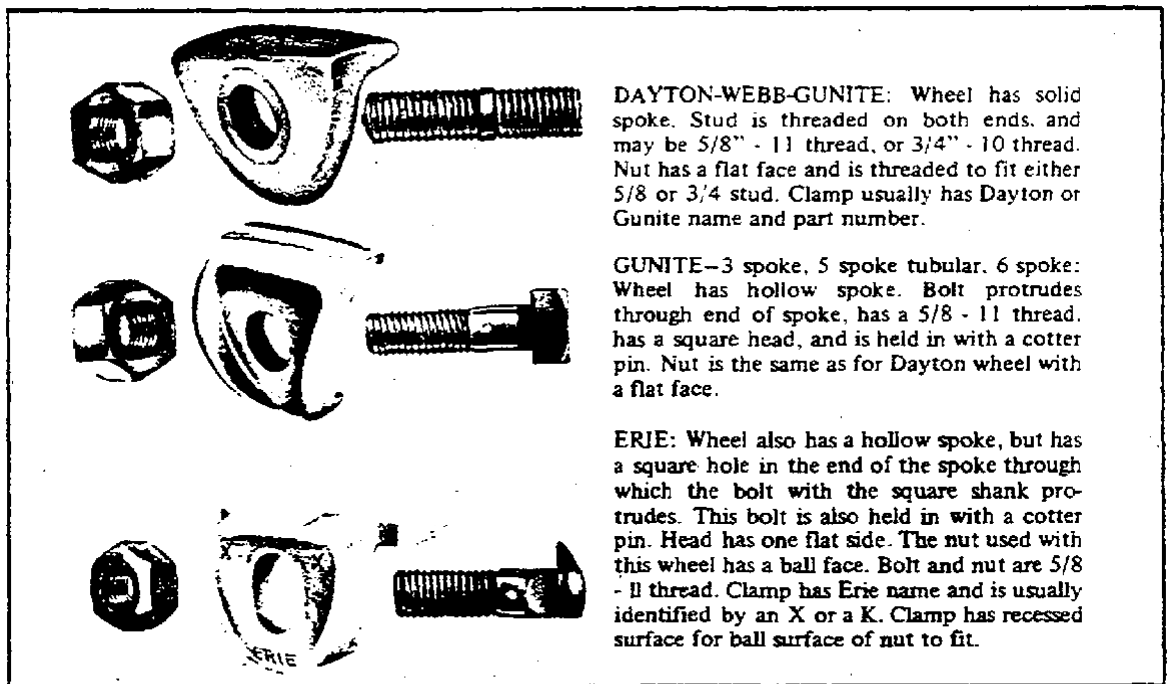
Cast Spoke Wheel Clamps, Studs, Bolts, and Nuts
